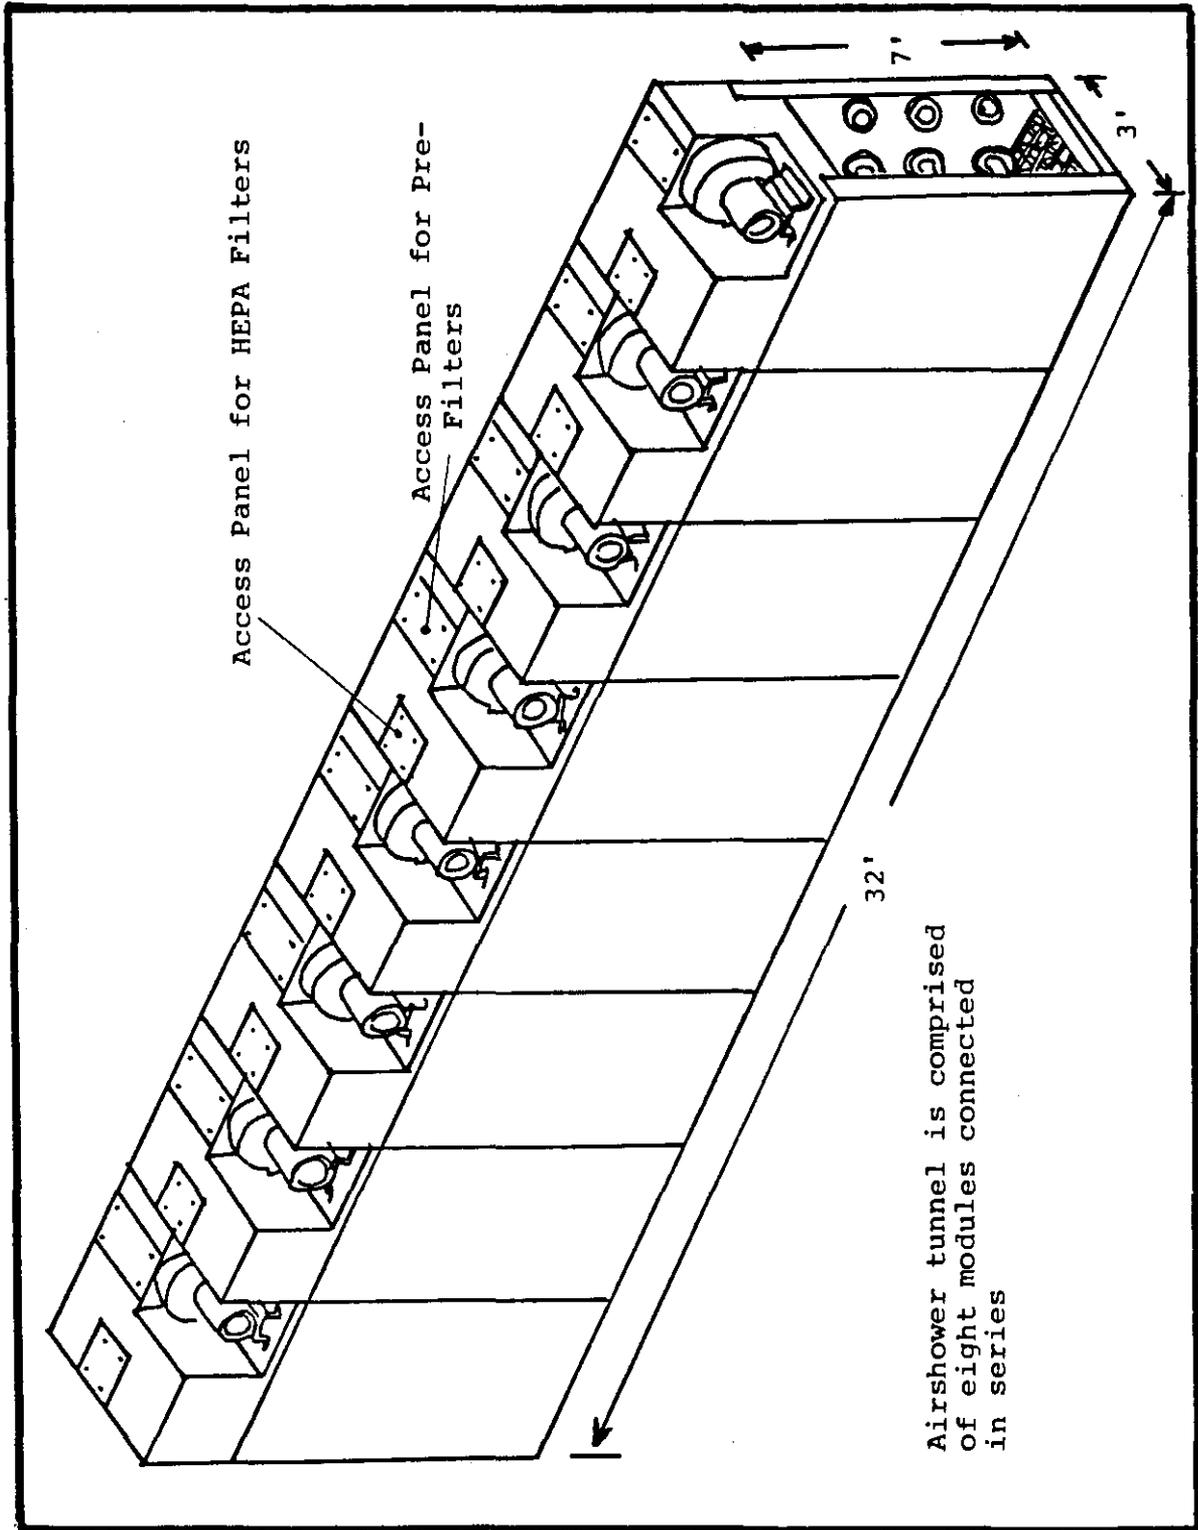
DRAWING OF AIRSHOWER TUNNEL AT SCHUYLKILL METALS
